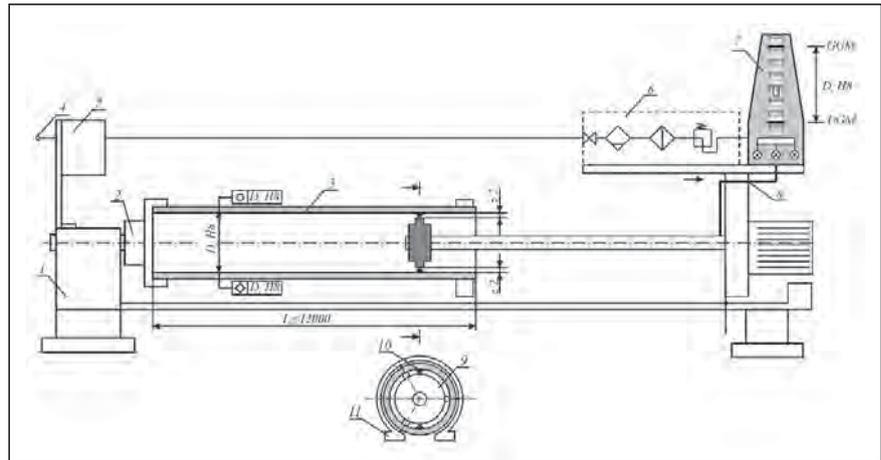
Pneumatic measuring-control system for cylinder tubes. 1. Machine, 2. Vice kit, 3. Workpiece (cylinder tube), 4. Air supply, 5. Pipe line adaptor, 6. Air preparation system, 7. Measurement device, 8. Measurement pipe line, 9. Measurement head, 10. Measurement valves, 11. Measurement head adaptor
